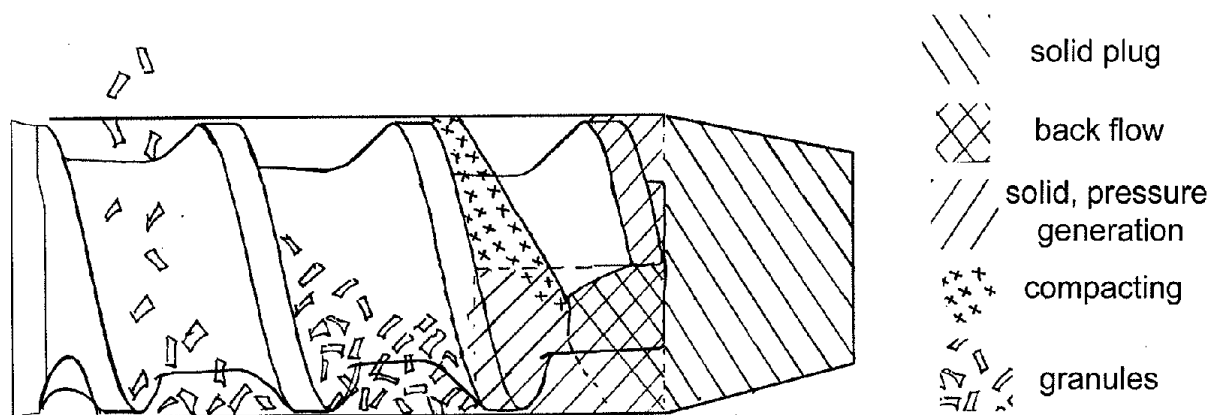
Schematic drawing of the in-house developed screw extruder at NTNU[12].
